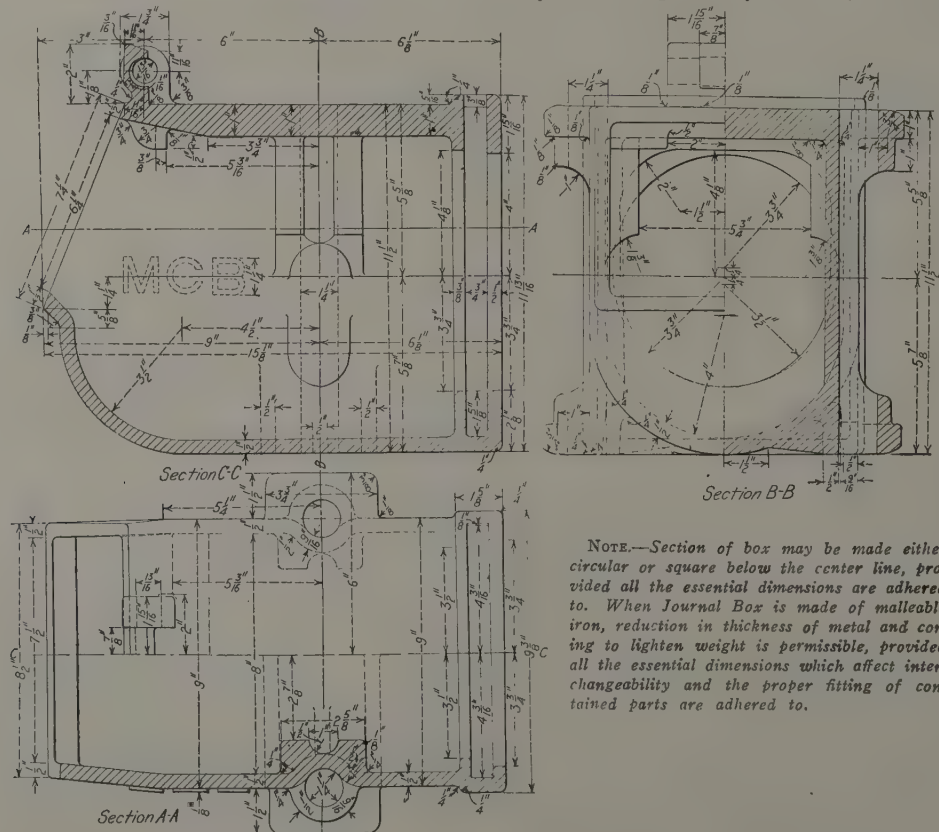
M. C. B. Standard Box for 5 in. by 9 in. Freight Car Journal. (M. C. B. Sheet 8.)
